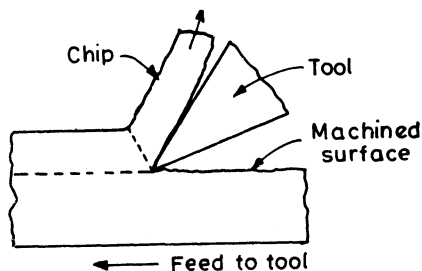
(e) The machining continues. The built-up edge gets sheared off. Very small portion of it remains welded to the tool. The machined surface improves.
